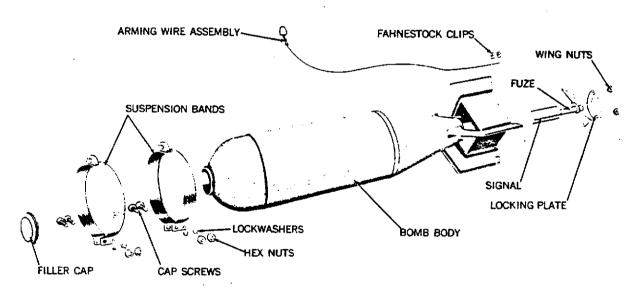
100-lb Practice Bomb Mk 15 Mod 3, Exploded View.
